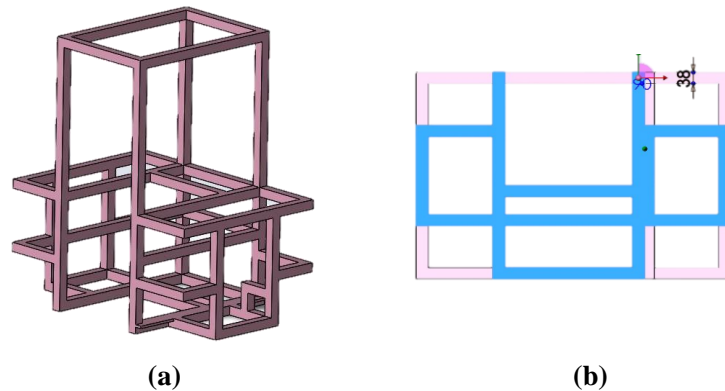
MHeLFAGV Chasis Design: (a) isometric view, (b) top view
